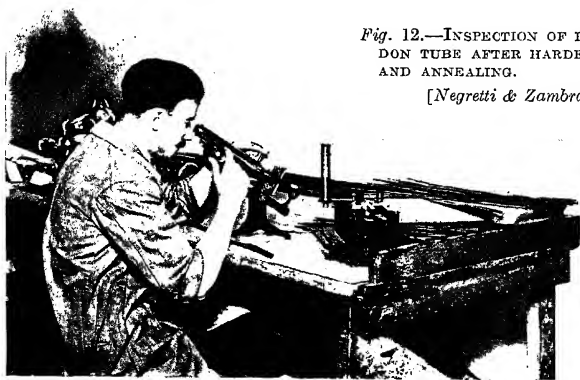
INSPECTION OF BOURDON TUBE AFTER HARDENING AND ANNEALING.
